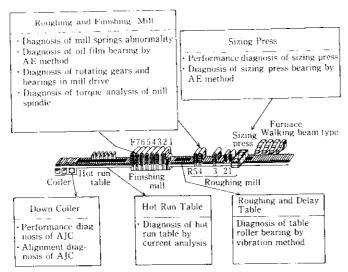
Layout of hot strip mill and items of main diagnosis technique
